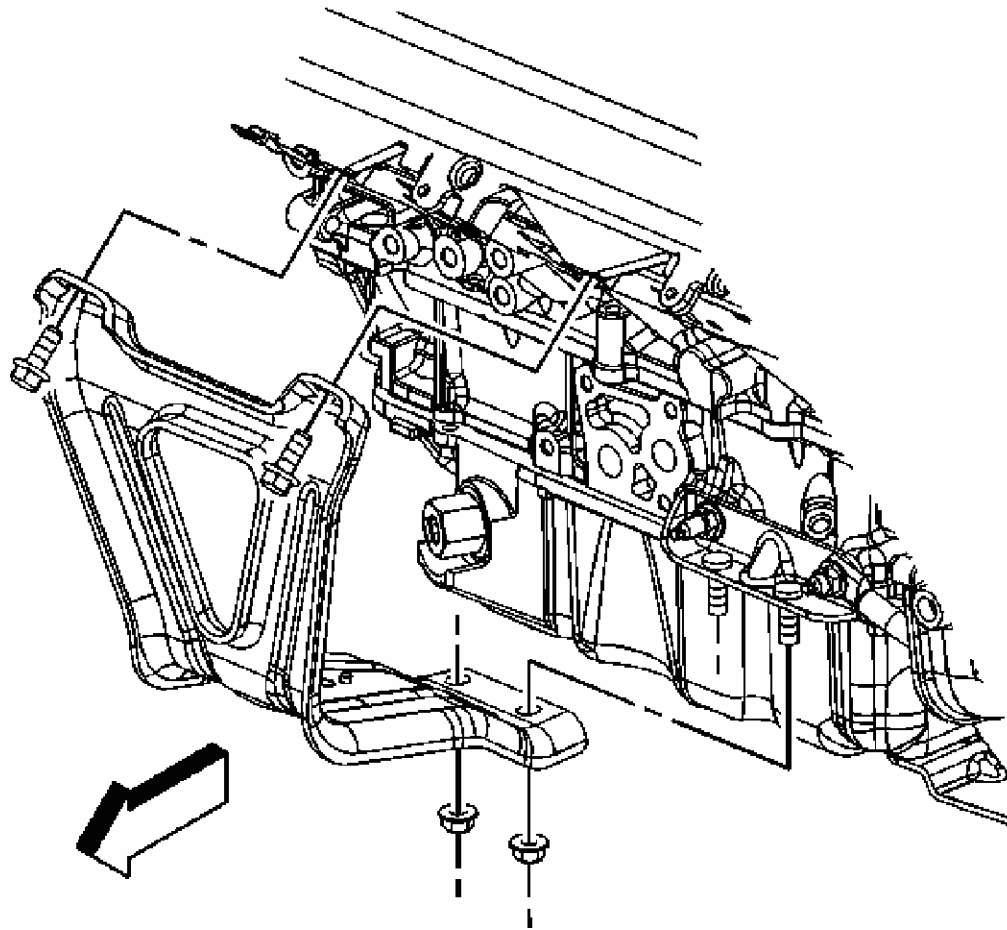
Identifying Front Engine Mount Bracket Bolts/Nuts
